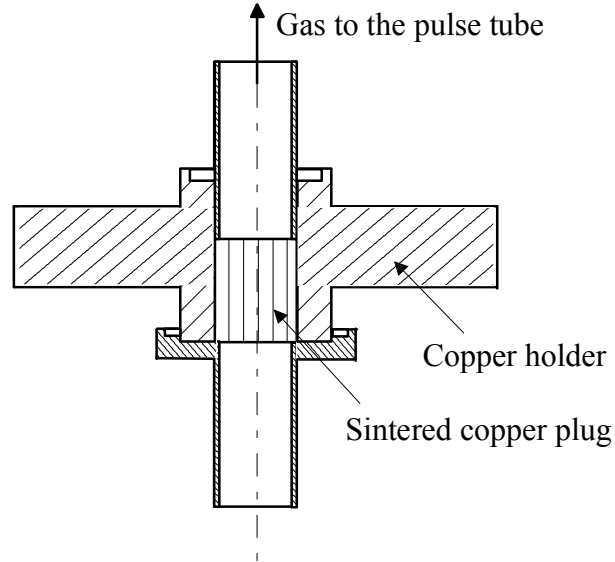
6. Schematic drawing of a 3rd stage cold heat exchanger, consisting of a sintered copper powder, filled in a copper holder. The heat exchanger is attached directly to the pulse tube by soft soldering.
